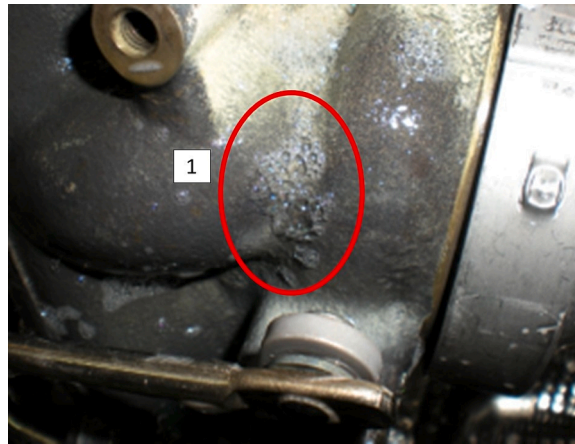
Engine B1 – left-hand side exhaust manifold, soap bubble test results.
